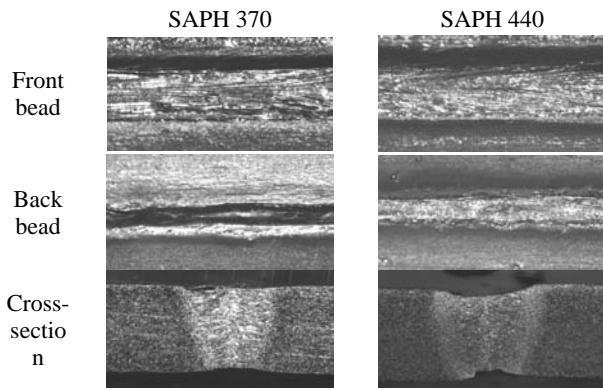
Weld bead shapes for hot-rolled steel
